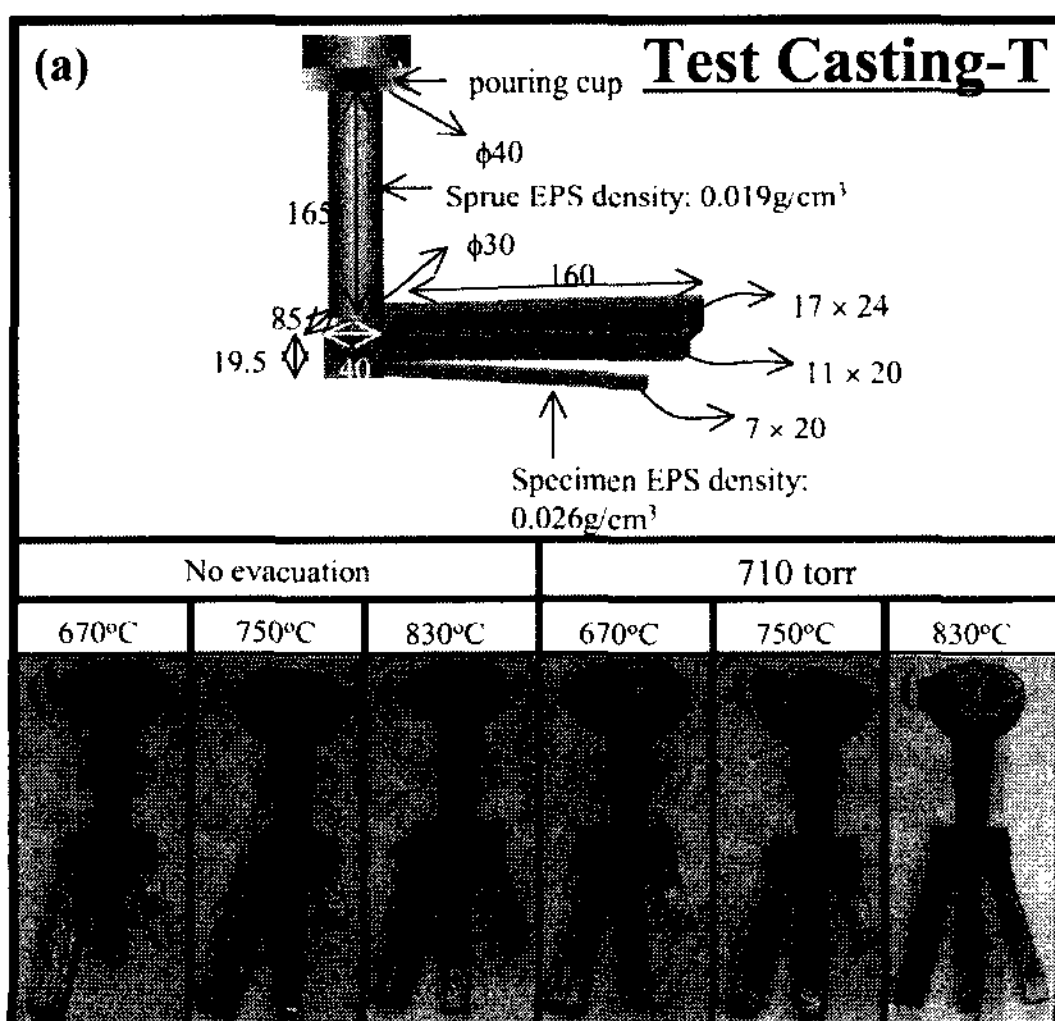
Test casting-T for the investigation of effects of pouring temp., casting thickness and mold flask evacuation on the fluidity of Al alloy melt; coating thickness = 0.18 mm.
